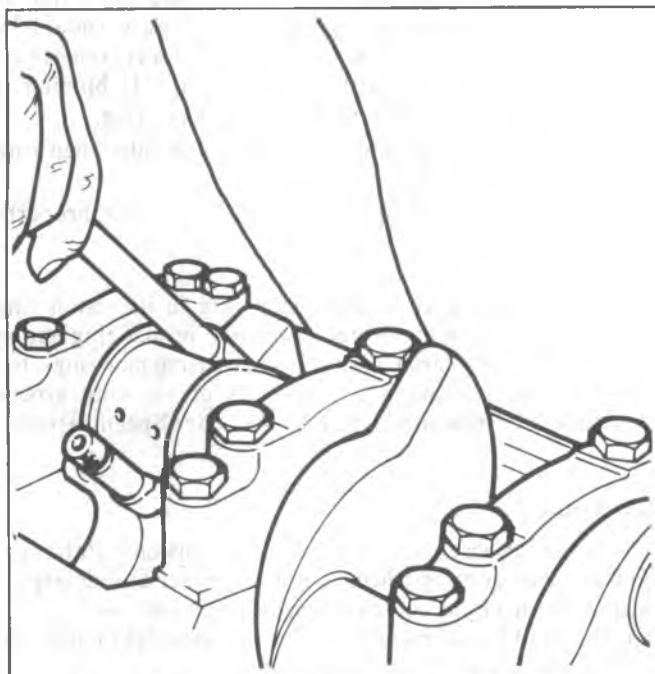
A1-39--Removing Connecting Rod & Piston Assembly
